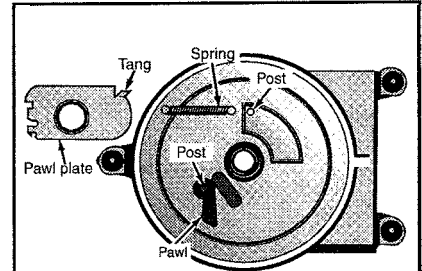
The pawl plate return spring is positioned between the plate tang and pulley post
